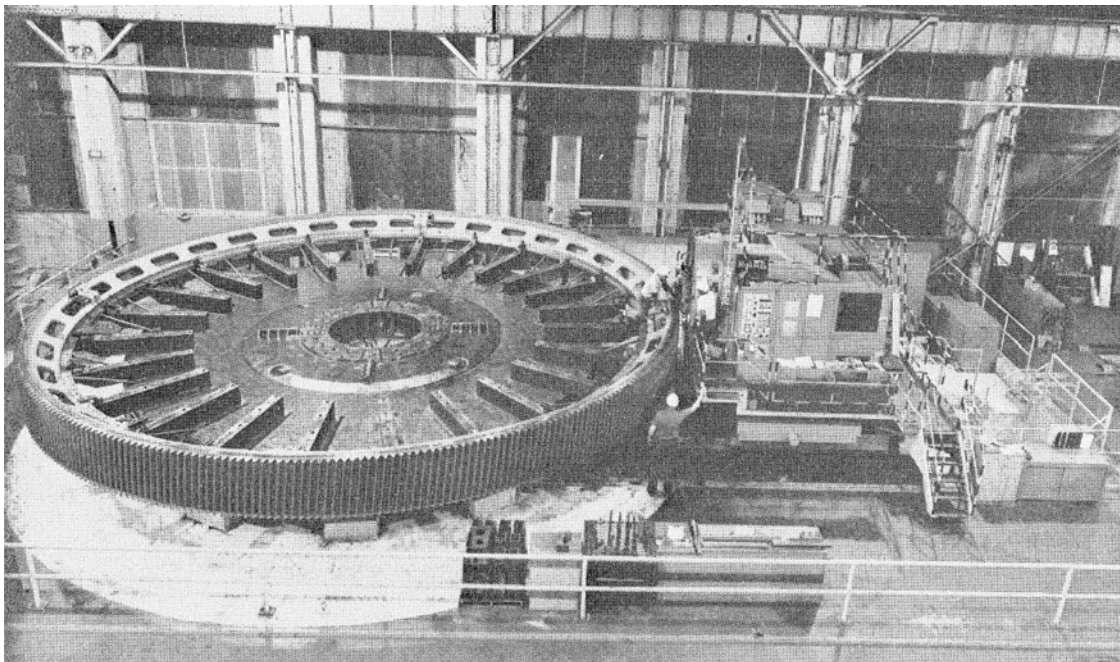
One of the largest gear-cutting machines in the world. A helical gear 11.9 m (469.9 in.) in diameter has just been rack shaped. (Courtesy of Fuller Company, Allentown, Pennsylvania.)
